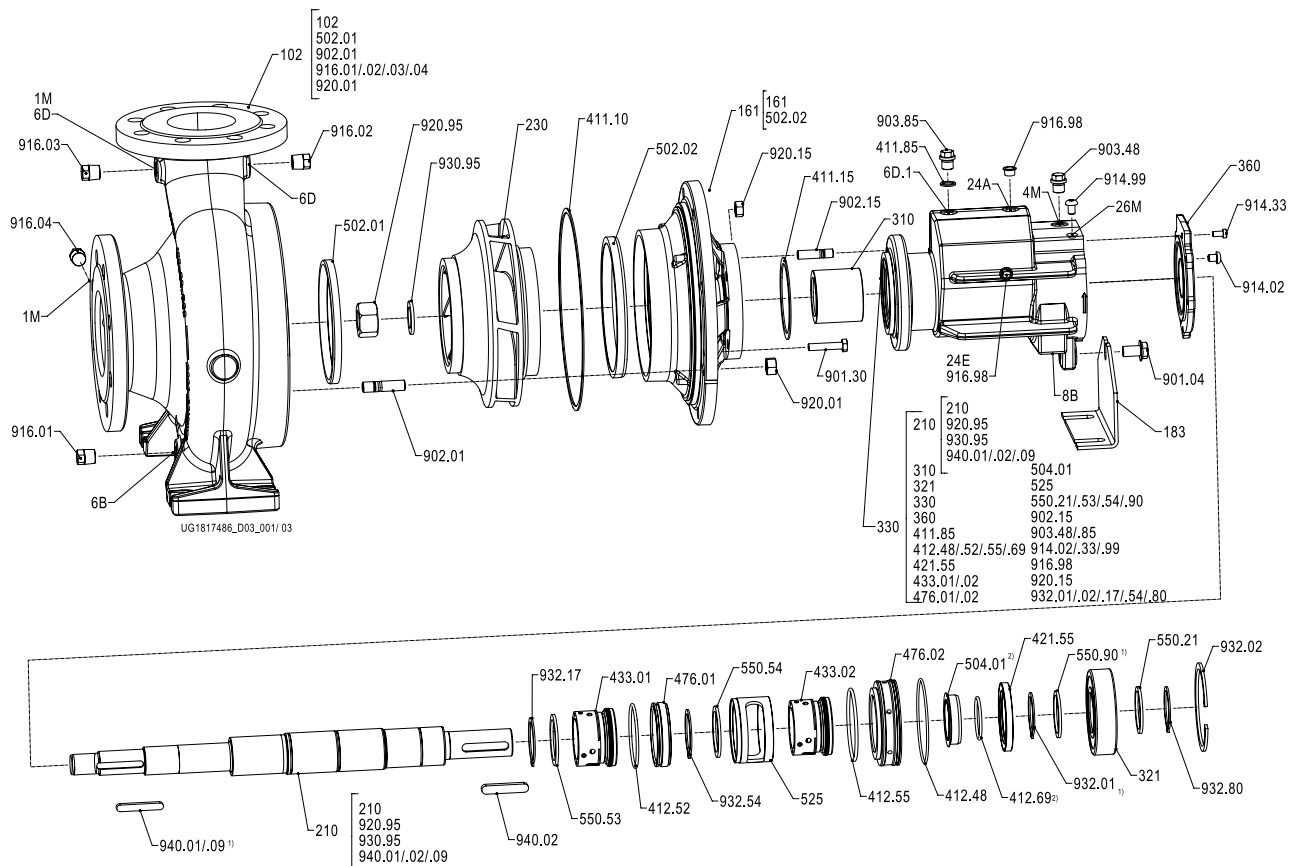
Exploded view of Etanorm SYT; bearing bracket WS_35_LS / WS_55_LS with double mechanical seal (special design)
